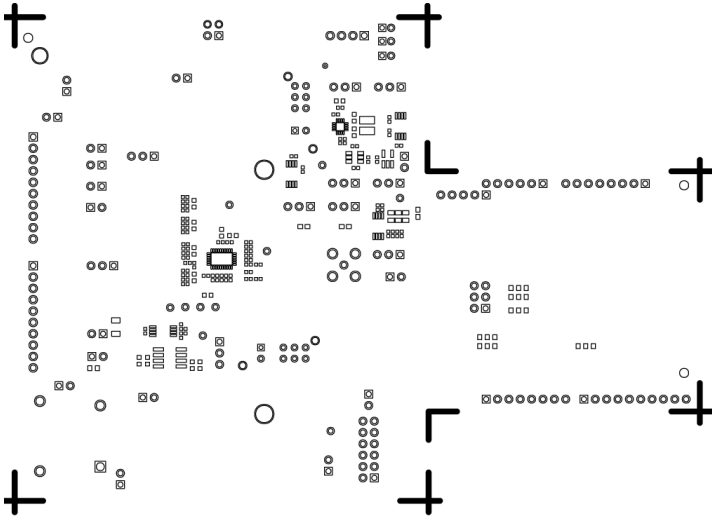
EVAL-AD4195-4ARDZ Soldermask Primary
